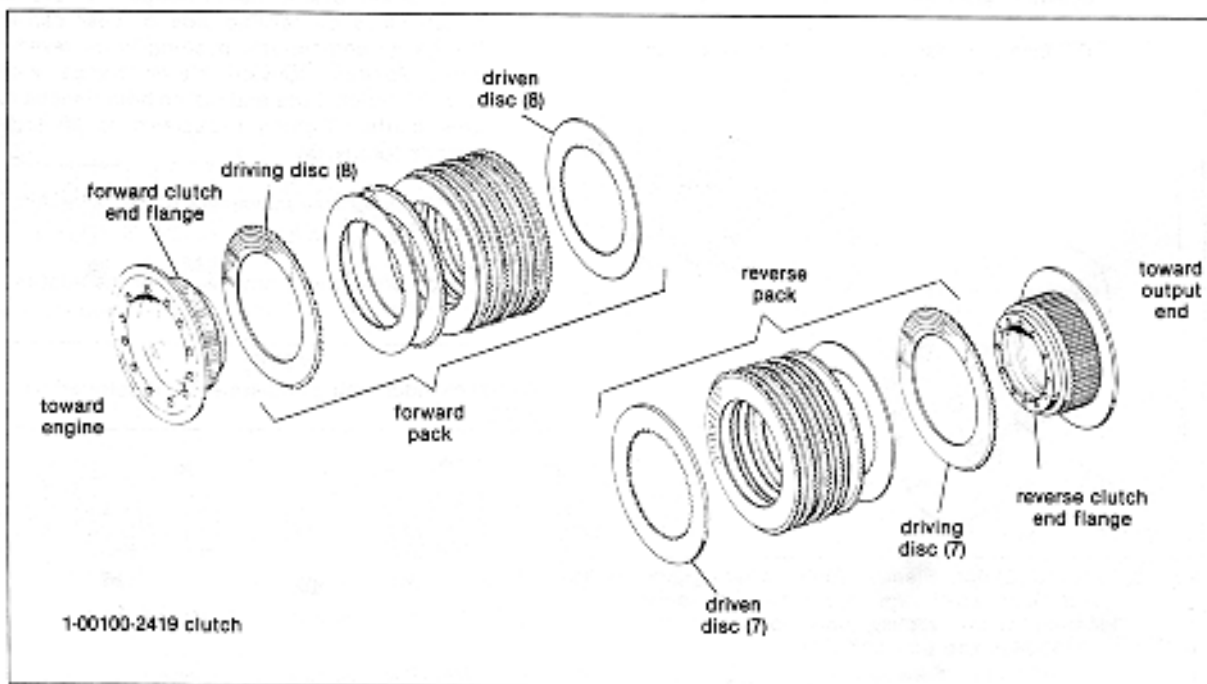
HY-500 Clutch Disc Configuration (1-00100-2419 Clutch Only)
